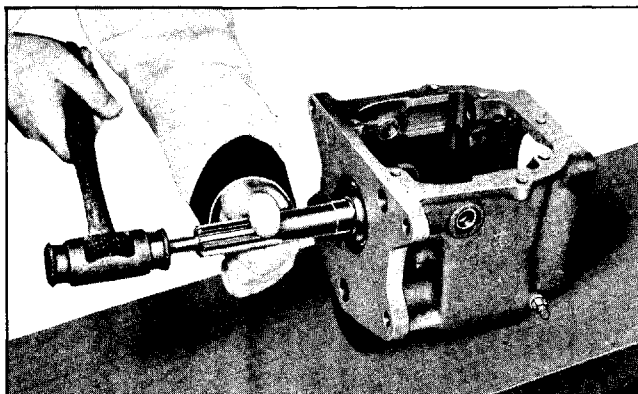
Removing Main Drive Gear and Bearing Snap Ring
